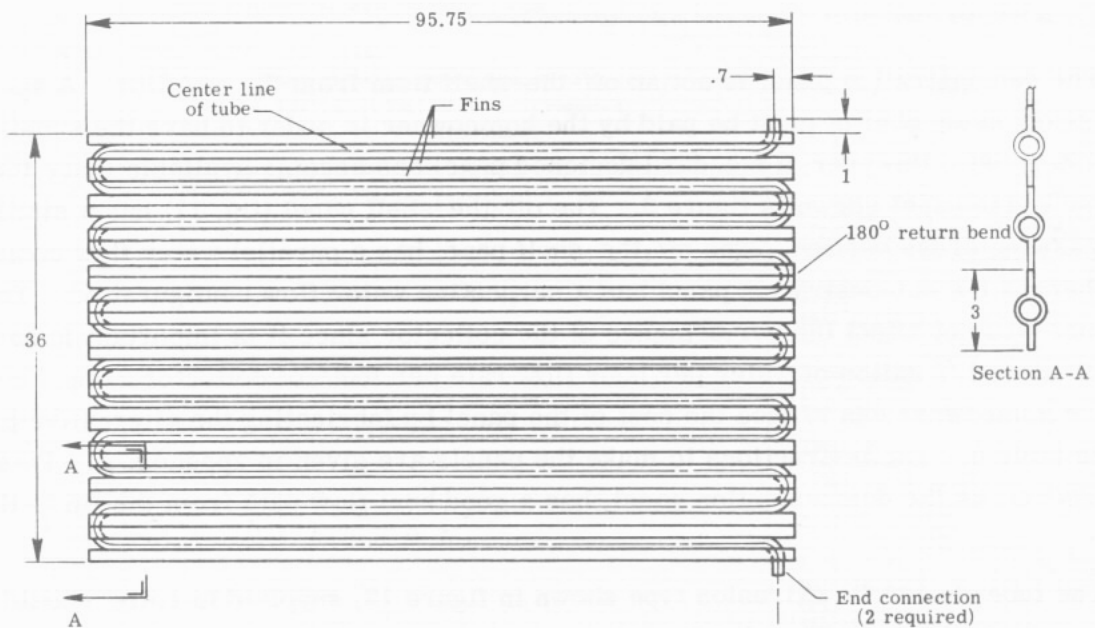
Homeowner's fabricated tube-fin extrusion type panel. Linear dimensions are in inches. (See figs. A1 to A3 for additional details.)
